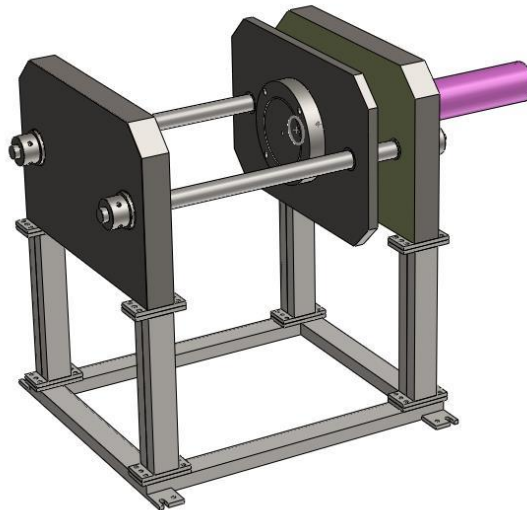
3D Model assembly view of 10MT valve testing equipment.
